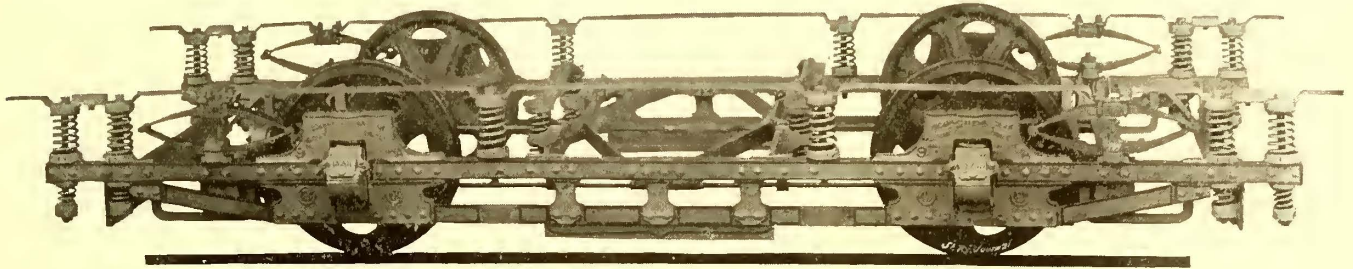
"METROPOLITAN SPECIAL" TRUCK FOR CONDUIT ROADS
